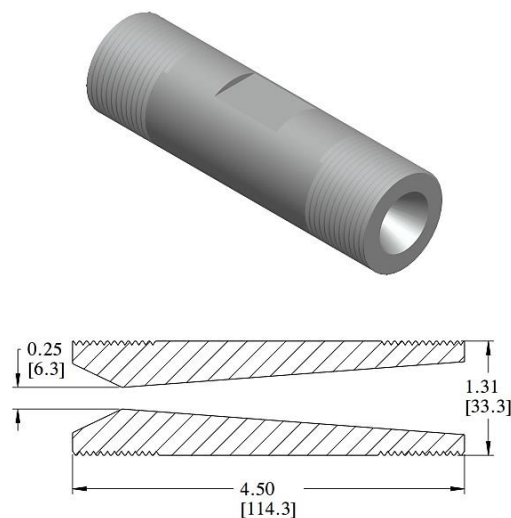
S-8. Schematic of the Sonic Nozzle with Cutaway View Showing Converging and Diverging Interior Sections
